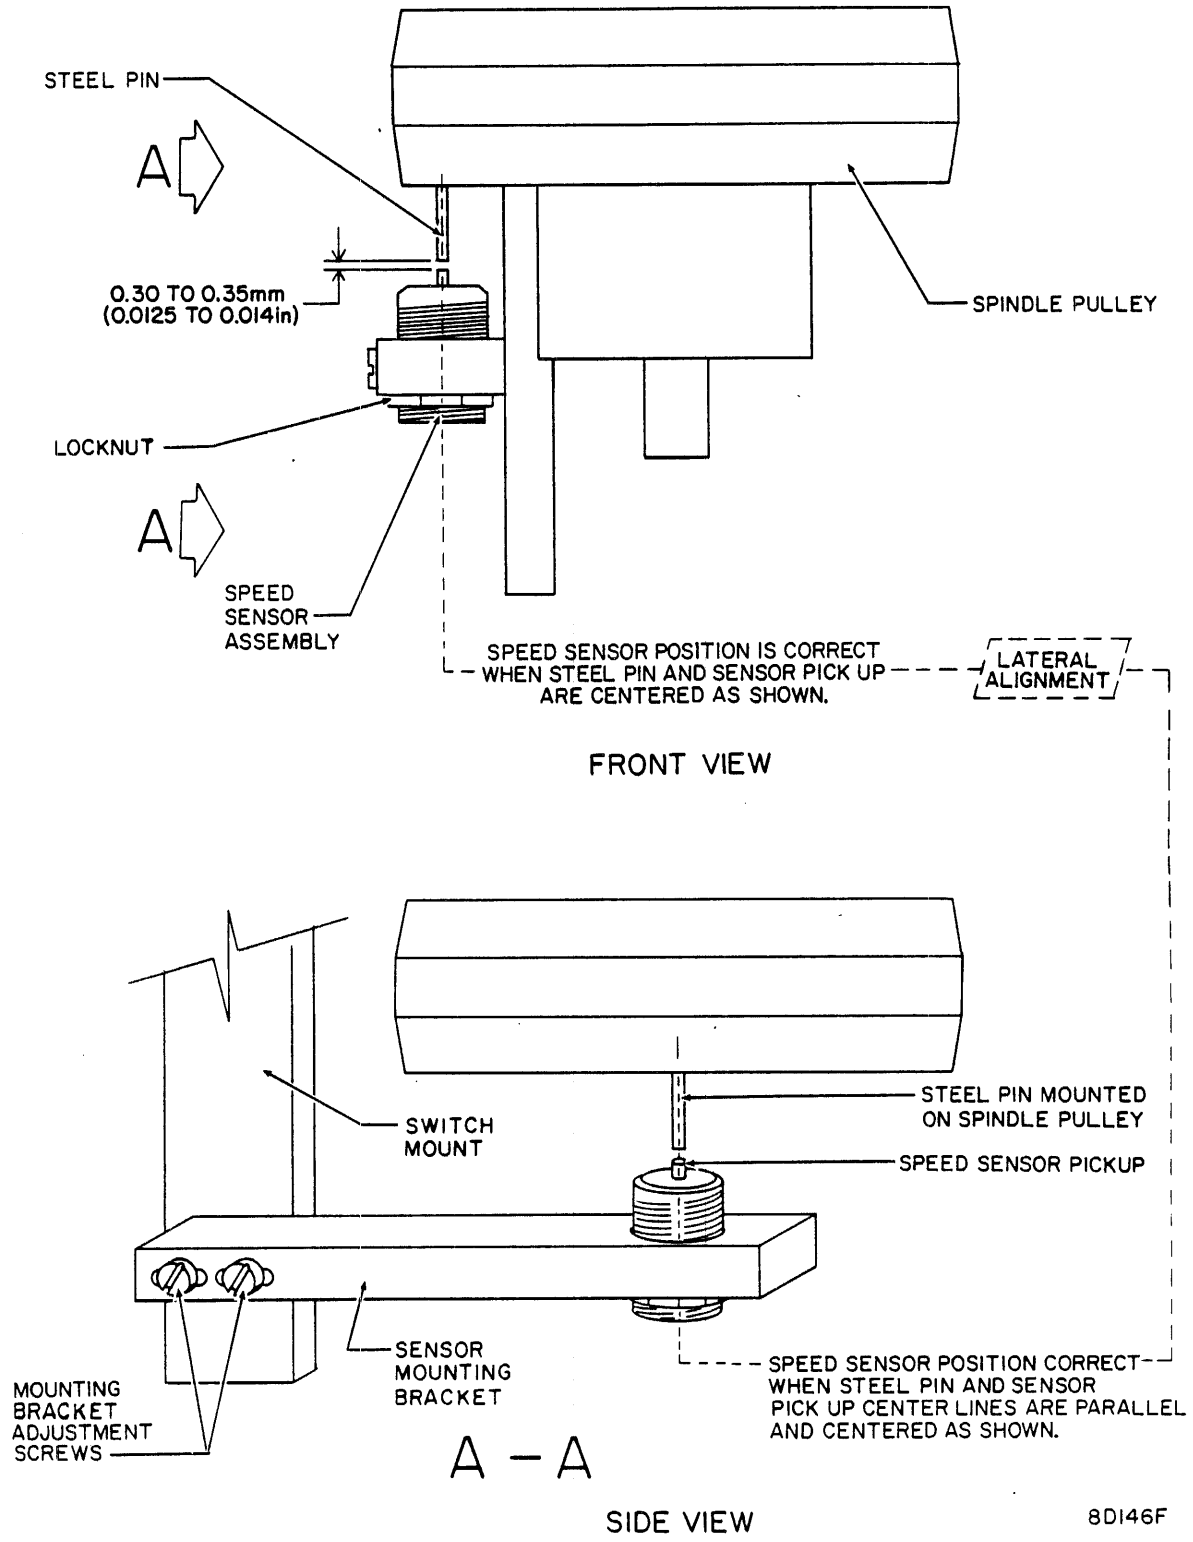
Speed Sensor Assembly Adjustment (S/C 08 and Below)
